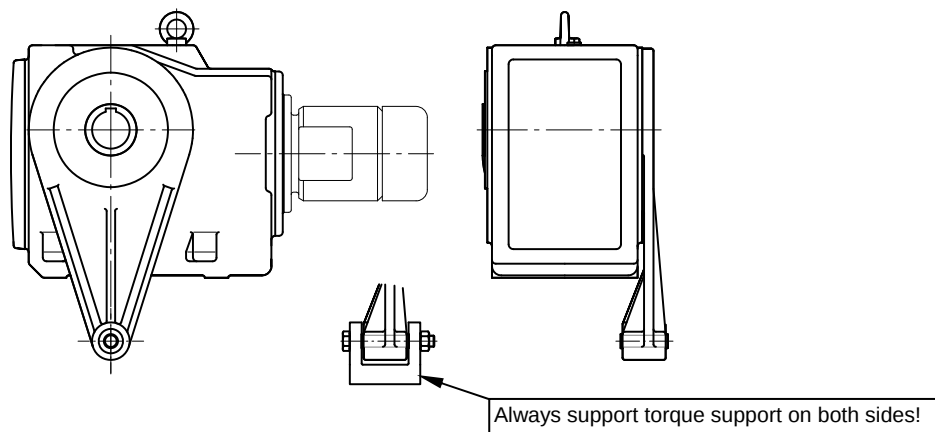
Attaching the torque support on bevel gear and worm gear units
